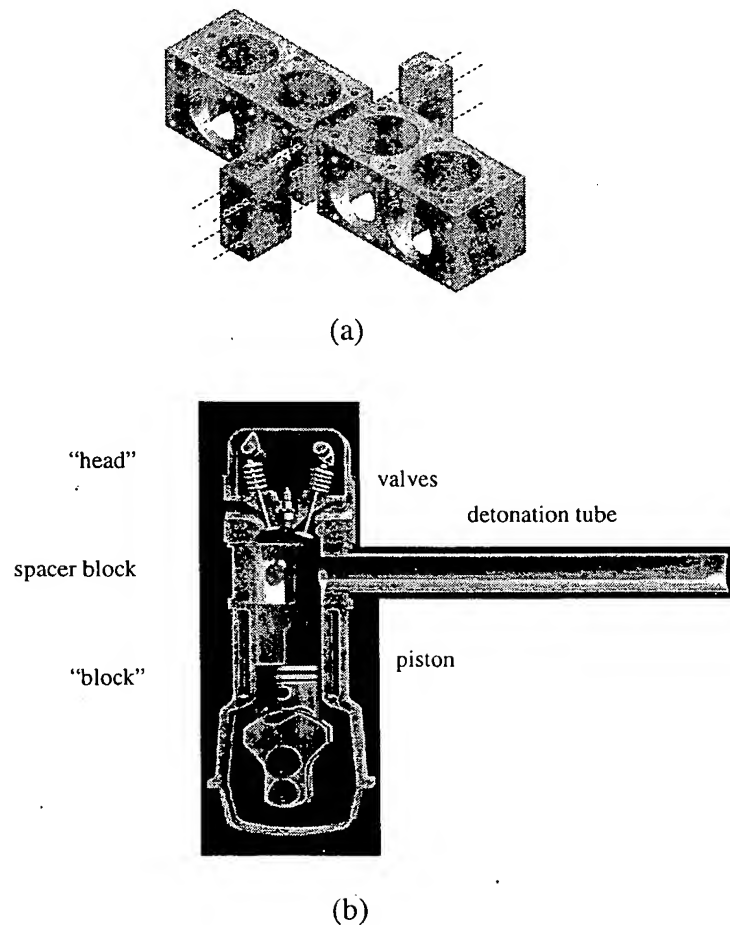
Spacer block: a) 3D cad drawing and b) Drawing of a cross section of the assembled hybrid piston-PDE
